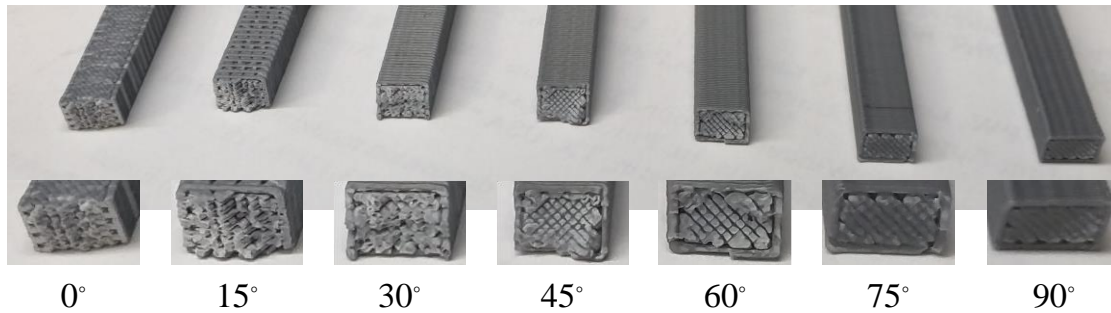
Fracture section of Design 1 specimens at each build angle
